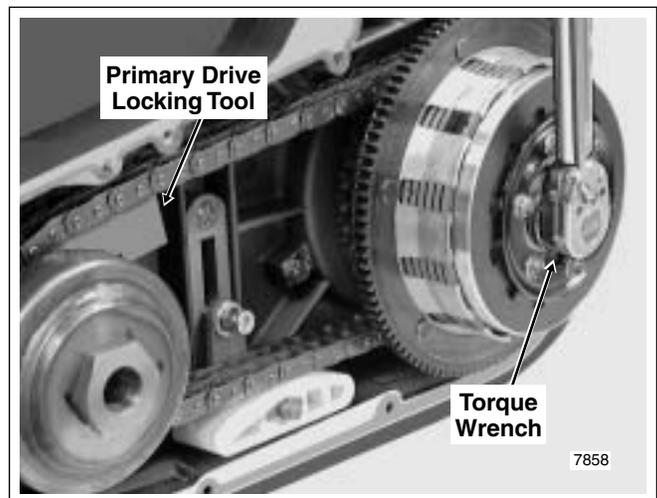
Place Primary Drive Locking Tool and Torque Clutch Hub Mainshaft Nut
